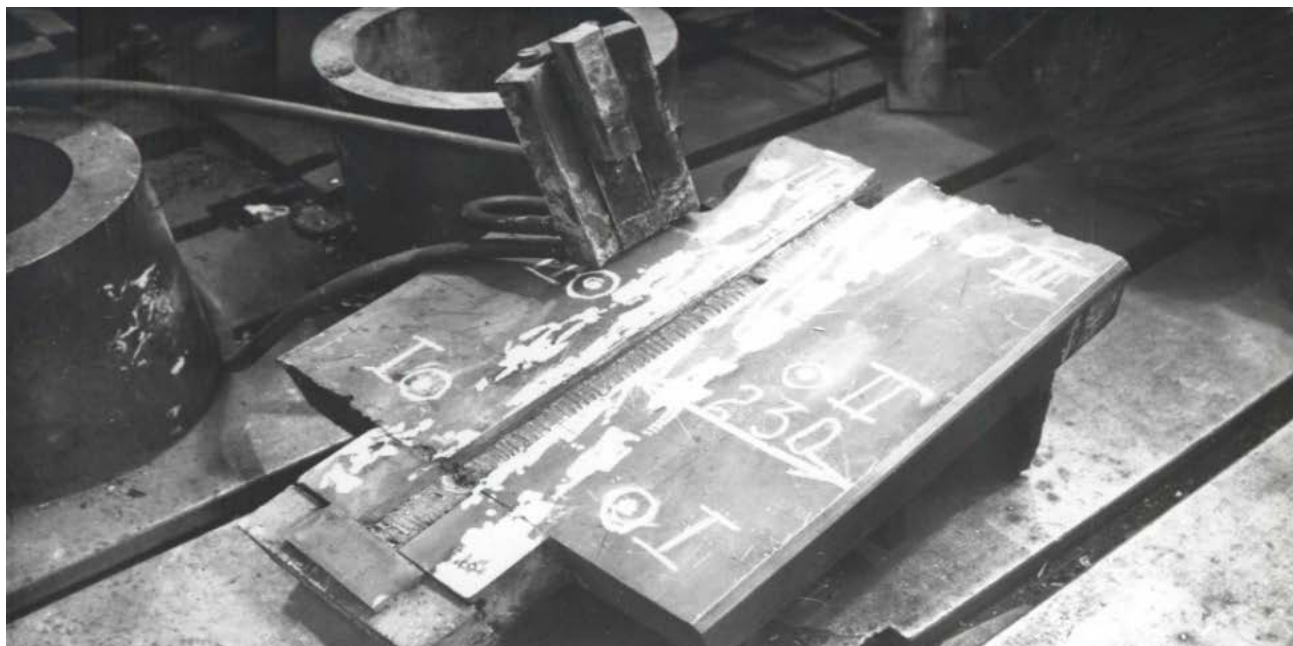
The sample welded from a two-layer steel and forming slide-block with a ledge, preventing hashing of a plating layer with the basic metal
